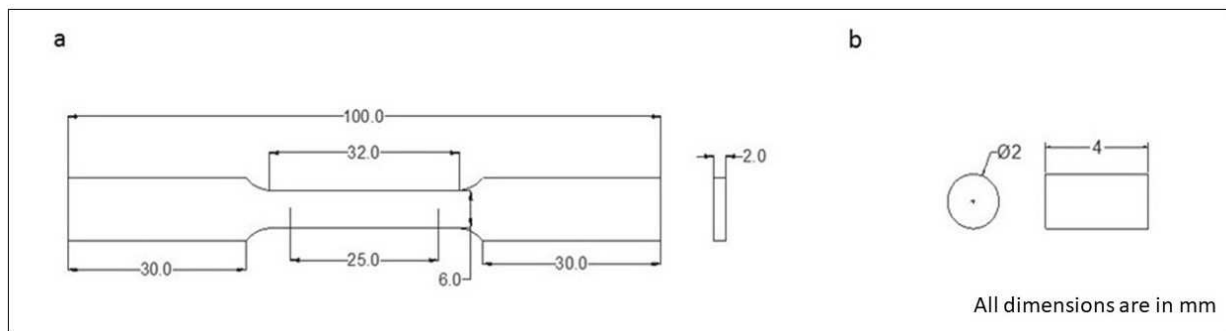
a) Tensile sample dimensions b) Compression sample dimensions
